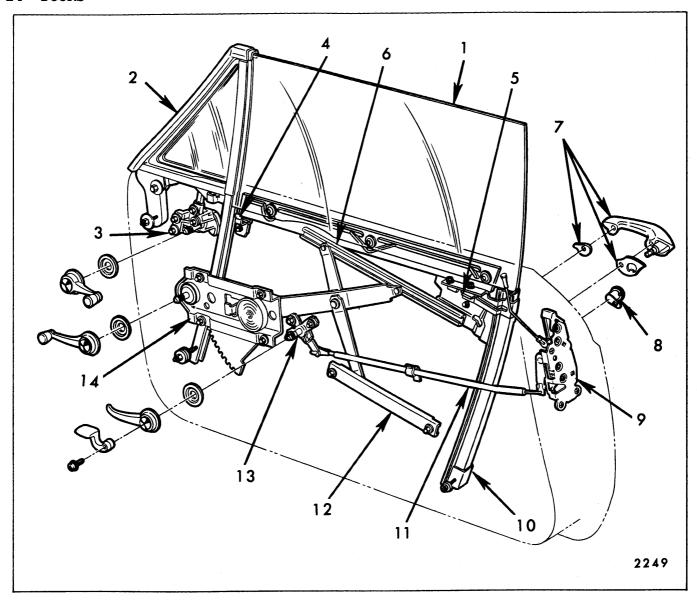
Front Door Hardware - "B & C" "37-47-57 and 67" Styles Shown - "39" and "C-69" Styles Similar
